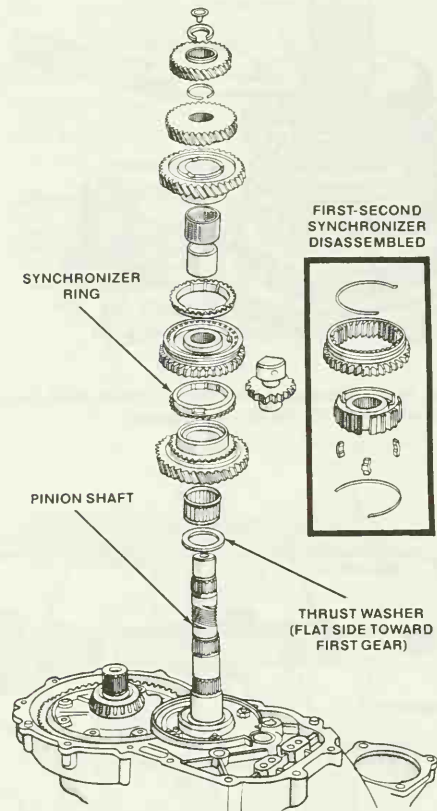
With the pinion shaft assembled, the parts are replaced on the shaft. (Chrysler Corporation)
